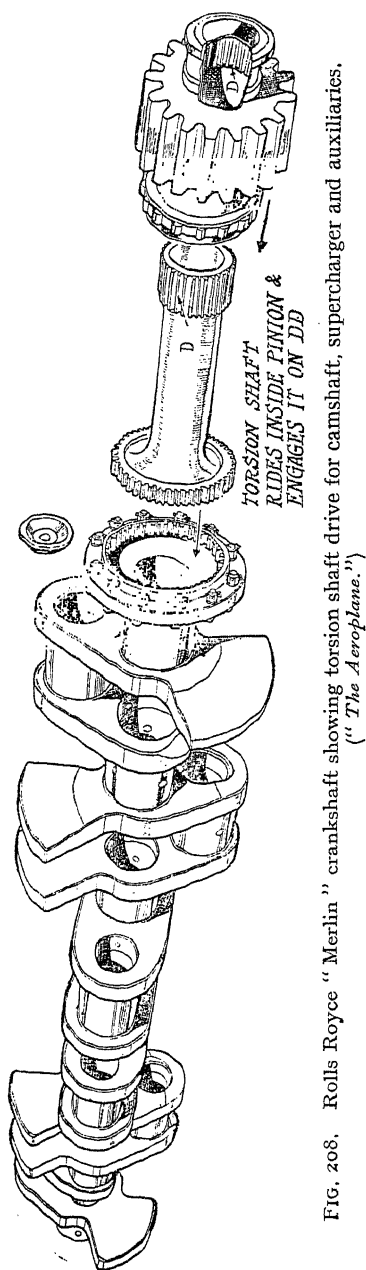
Rolls Royce "Merlin" crankshaft showing torsion shaft drive for camshaft, supercharger and auxiliaries.
